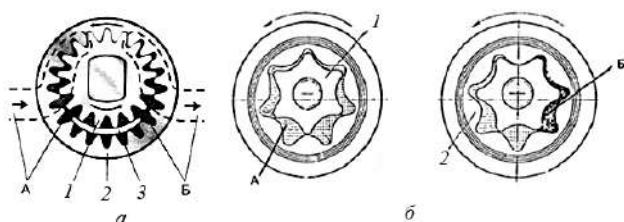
Schemes of oil pumps with internal gearing: a – involute gearing; б – gerotor gearing;
